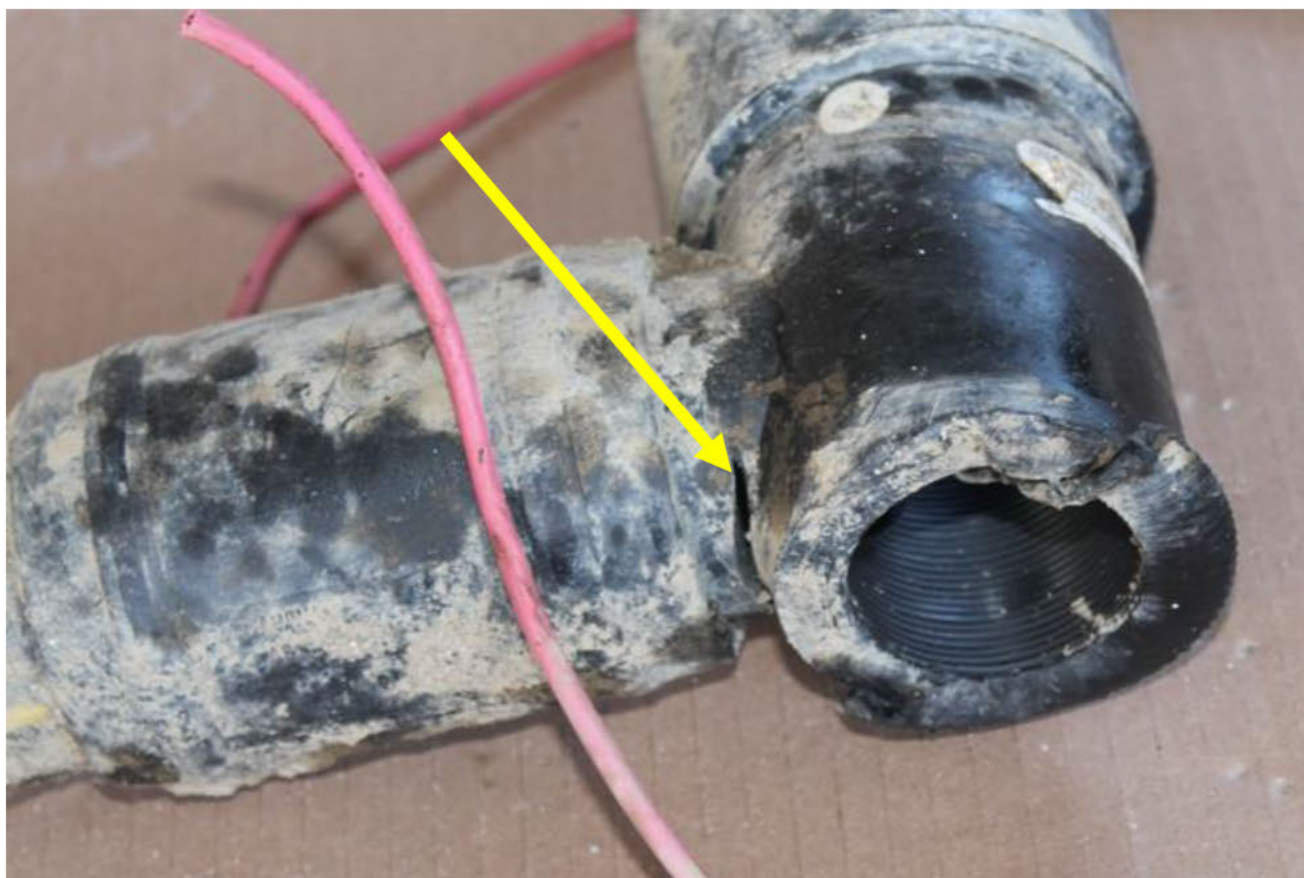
Crack failure of the service tee for 1642 Park Avenue at the bottom of the molded outlet (Photo taken 3/21/14) .
